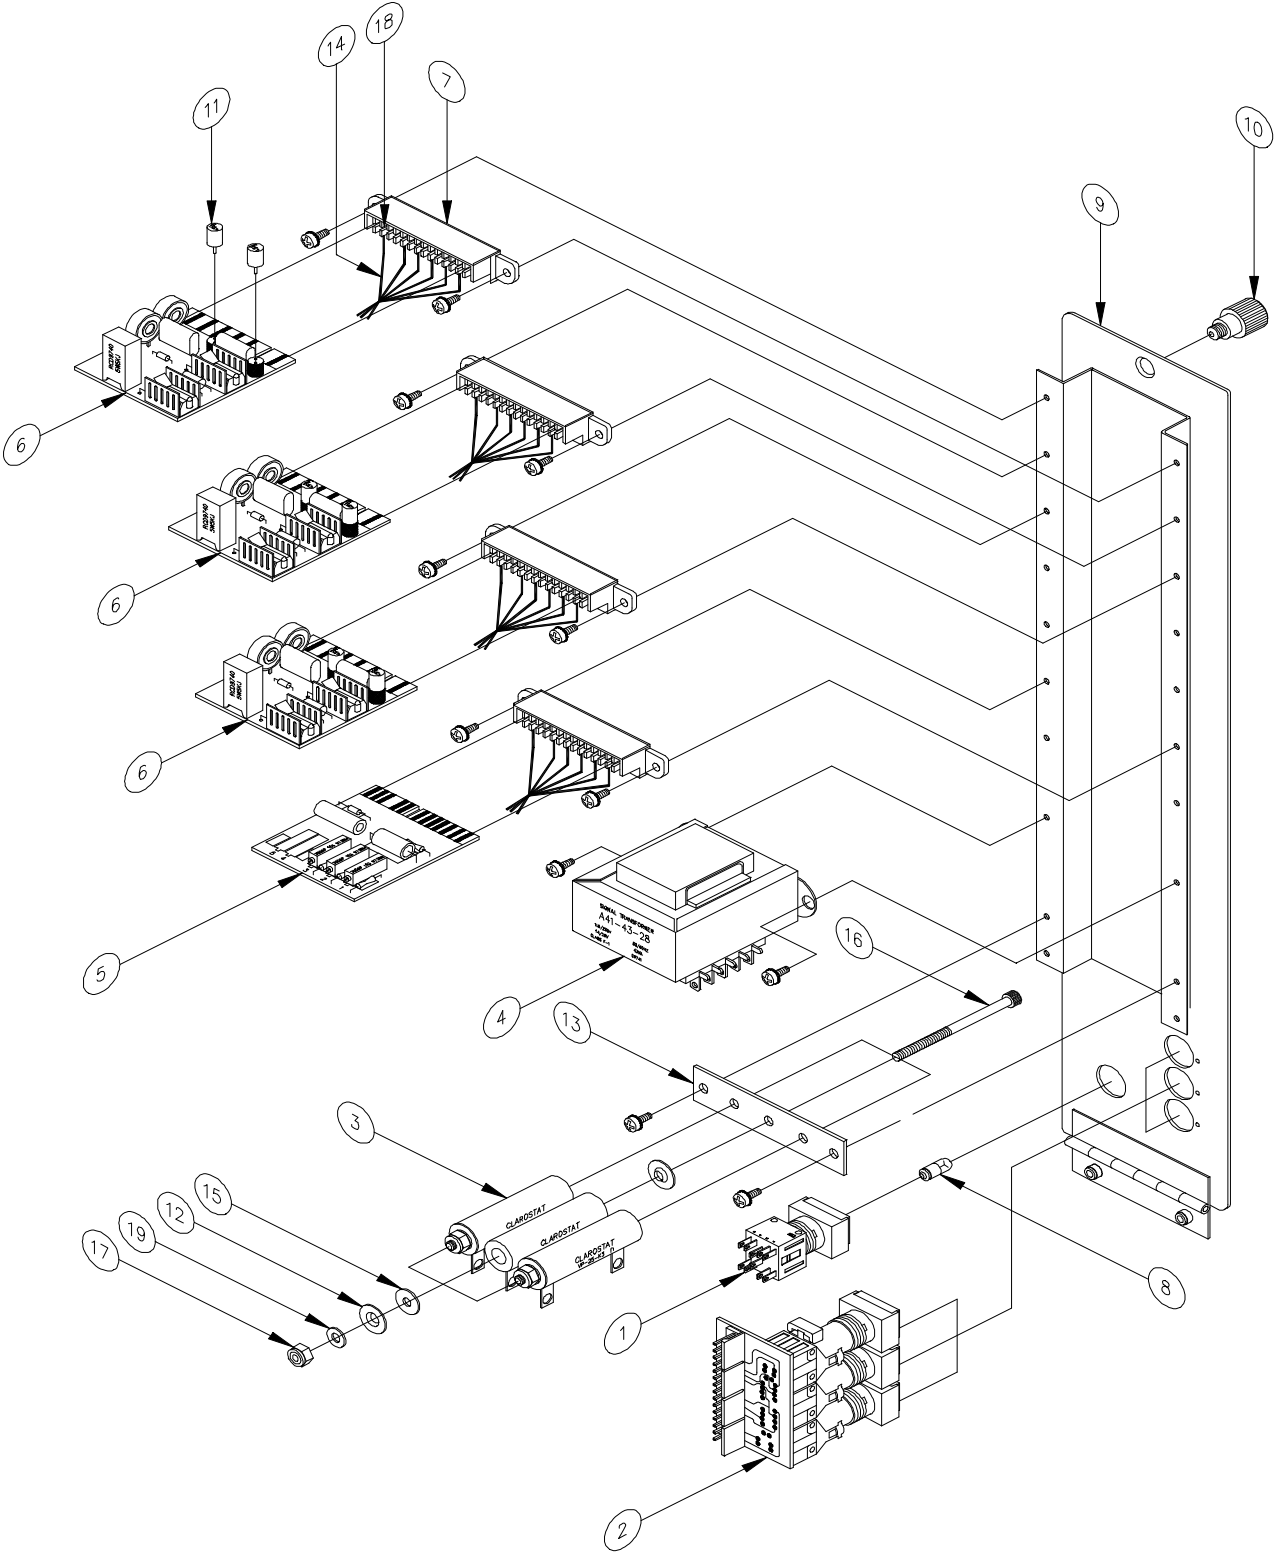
Door Panel and Control Modules Assembly Diagram
